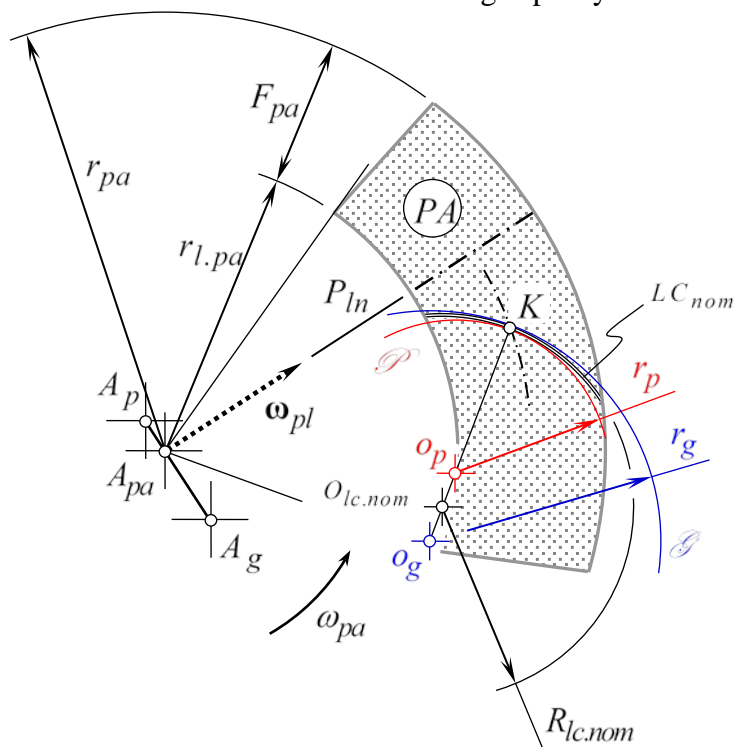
Schematic of crossed-axes gearing with high-conformal contact in the lengthwise direction of the gear teeth.
